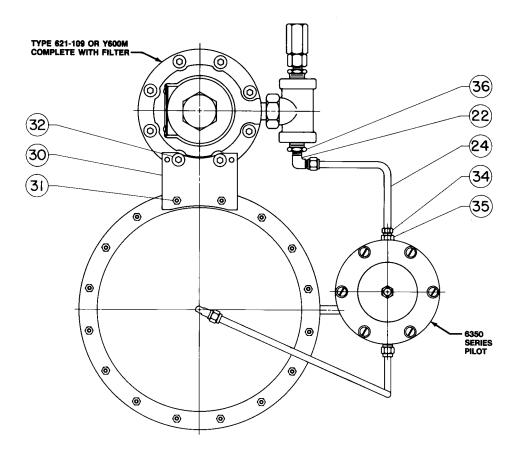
Dual-Mounting Parts for Working Monitor Regulator
